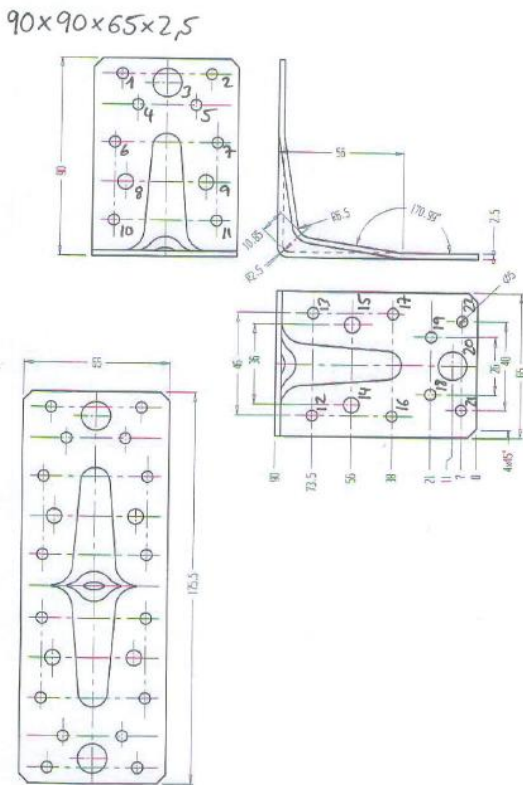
Dimensions of angle bracket 90x90x65x2,5(with rib)
